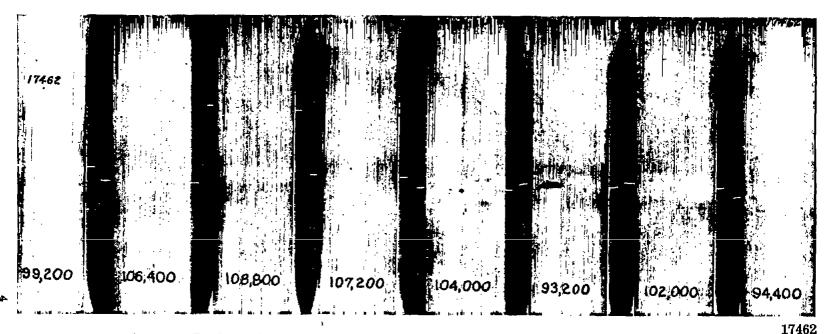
Radiograph of metal-arc-welded static tension specimens in 1/2-inch SAE 4130 sheet.
